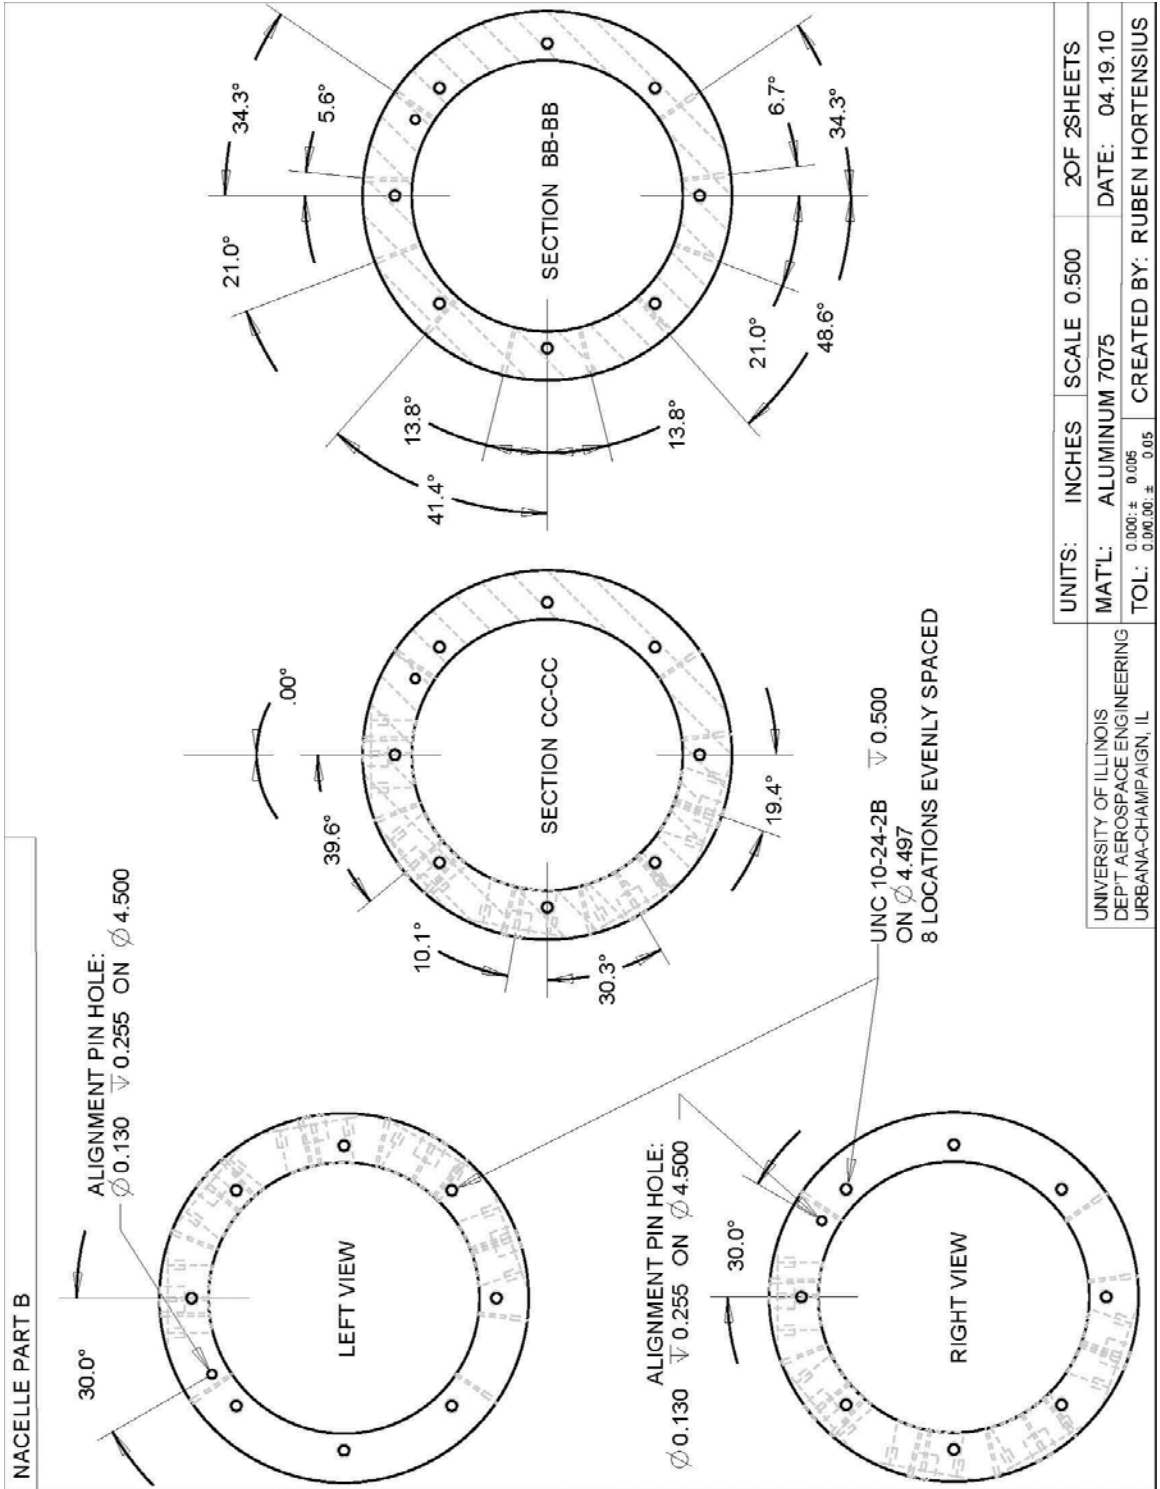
(cont.). Nacelle Part B Engineering Drawing.
